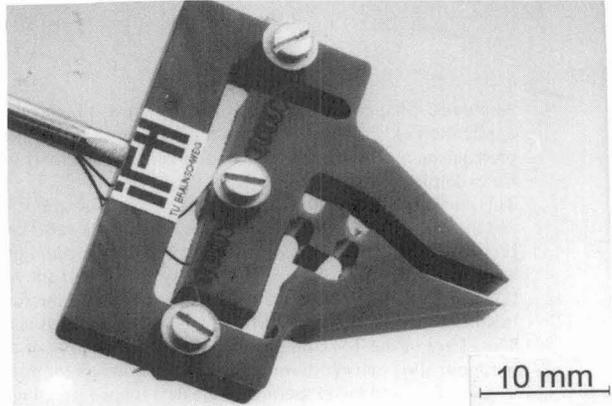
Prototype of a miniature gripper for micro assembly using two helical springs in a differential actuator design [1].
